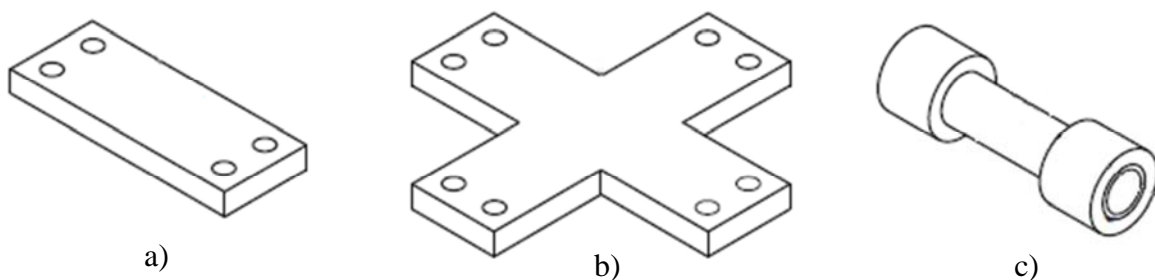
Possible specimen geometry: a) flat, b) cruciform, c) tubular.
